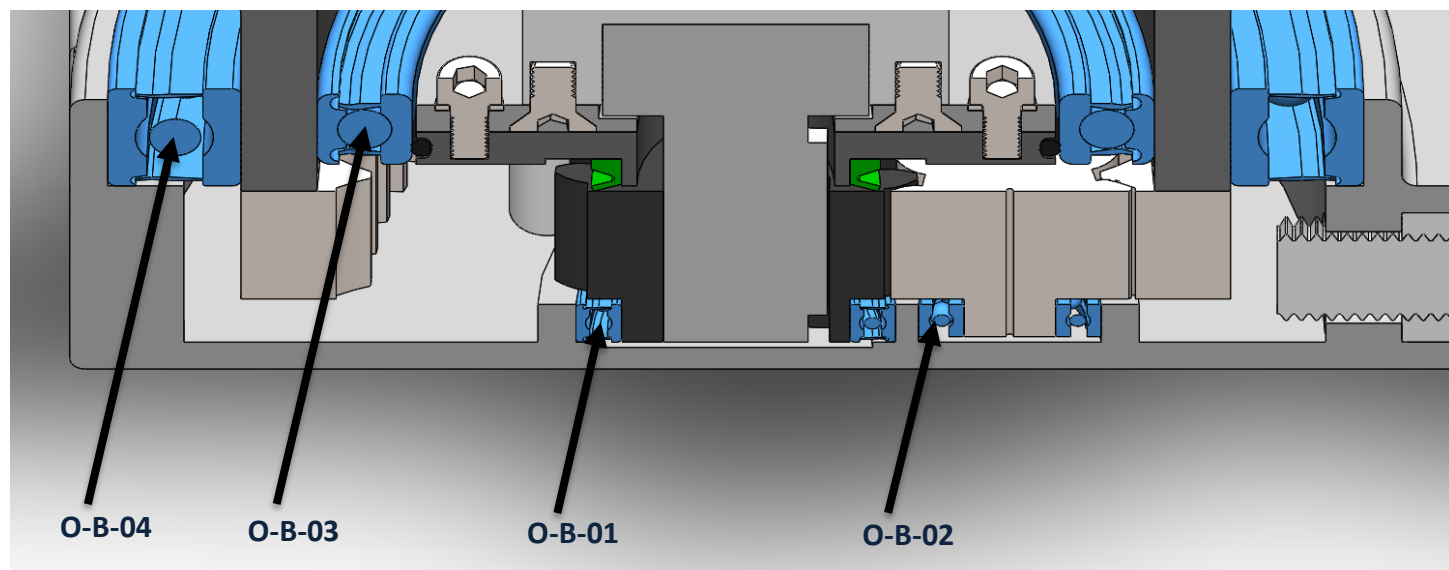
Section view of system assembly displaying bearings highlighted in blue.
